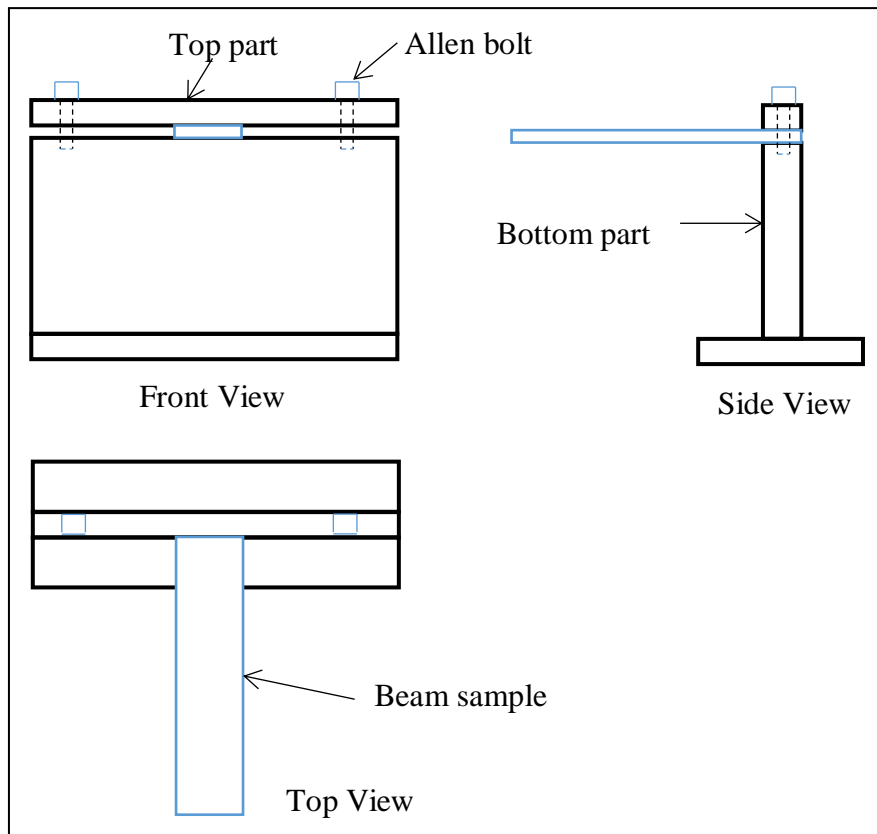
Schematic representation of mounting of beam sample in the mounting arrangement.
